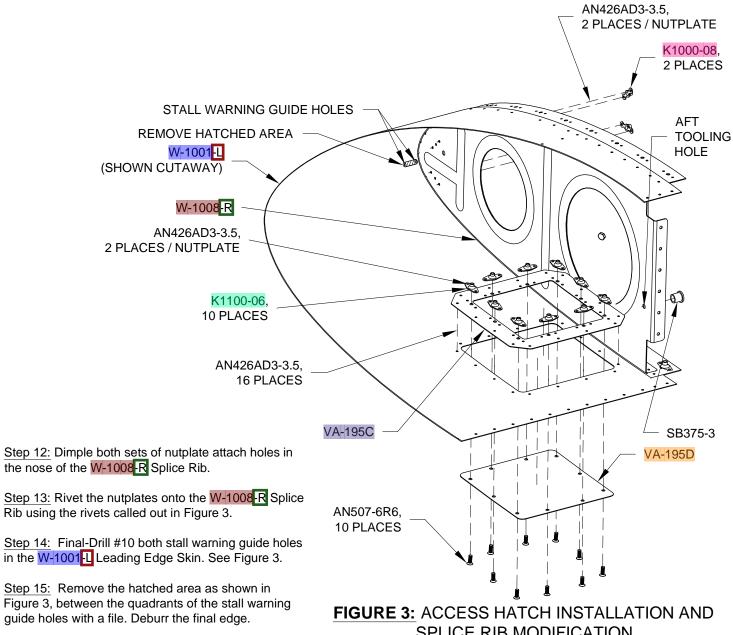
ACCESS HATCH INSTALLATION AN SPLICE RIB MODIFICATION (SOME PARTS OF THE WING ASSEMBLY HAVE BEEN OMITTED FOR CLARITY)
